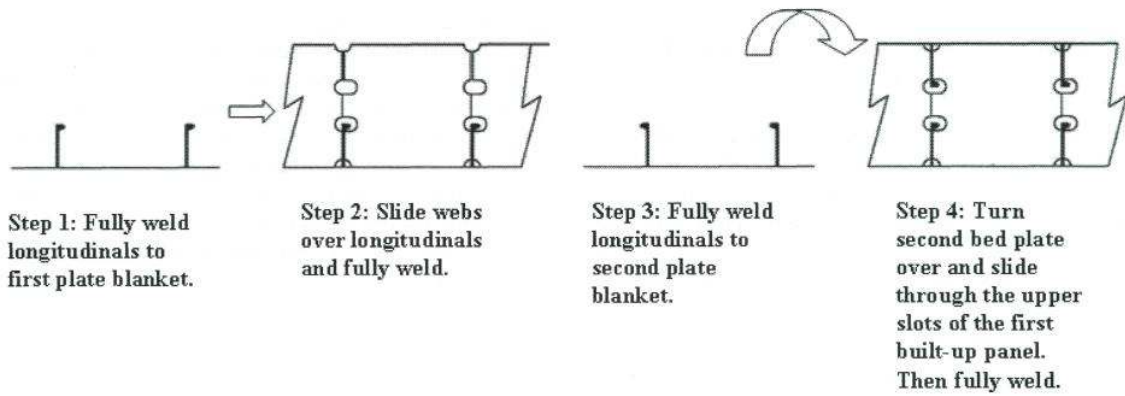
Lean manufacturing panel-block assembly method [4], [9]
